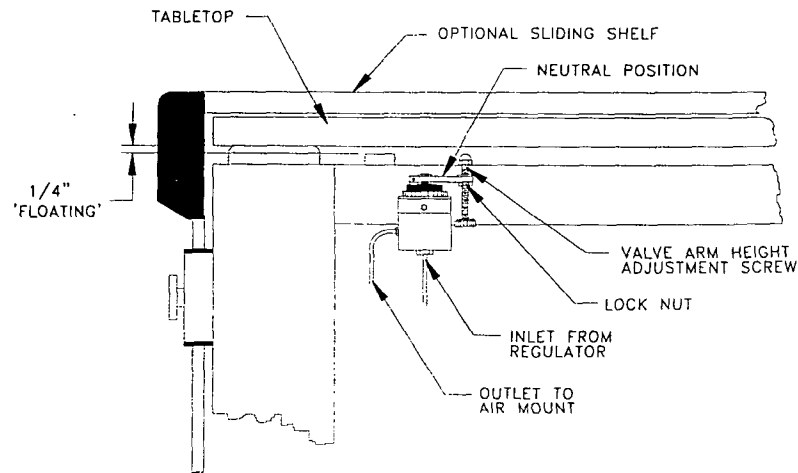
The VIBRA-LEVEL Valve Adjustment.
